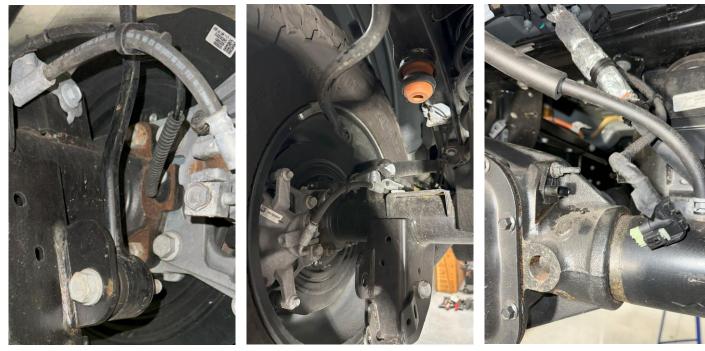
Rear sway bar end link before and after removal, and differential wiring harness removed
